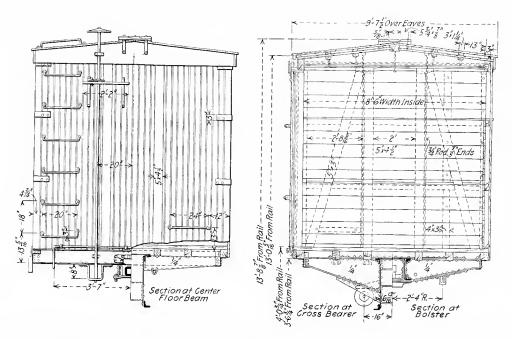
End Elevation and Cross Sections of Chicago Great Western Steel Underframe Box Car Shown in Fig. 277.
